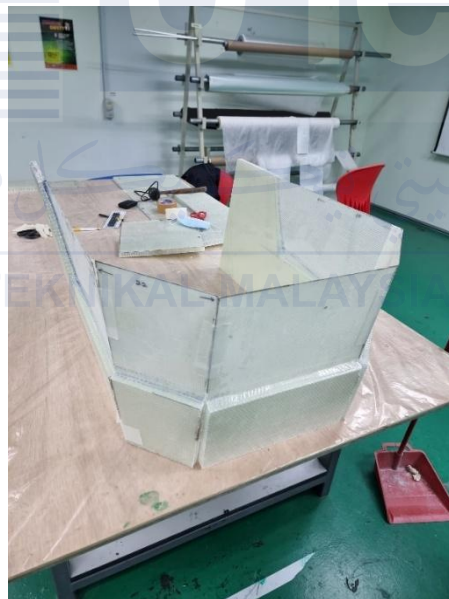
shows the process of assembling all parts to form the shape of the body.
